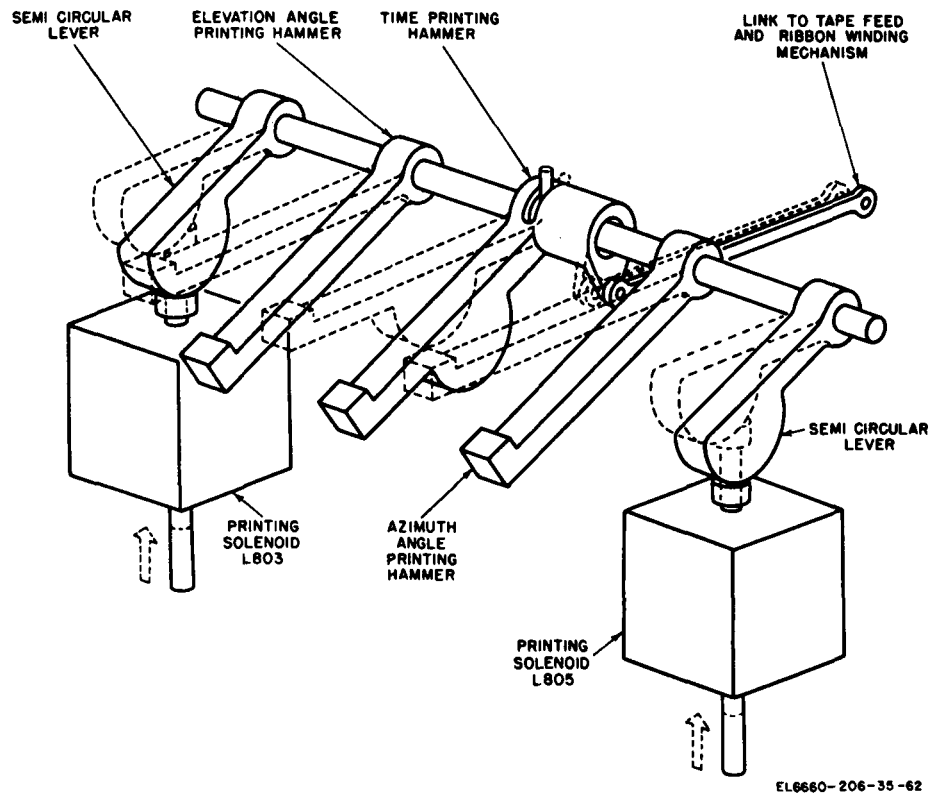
Printing solenoids L803 and L805 (except C-577E/GMD-1), mechanical diagram.
